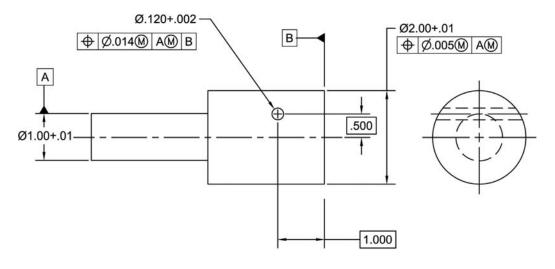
"NEW" Drawing with GD&T.
